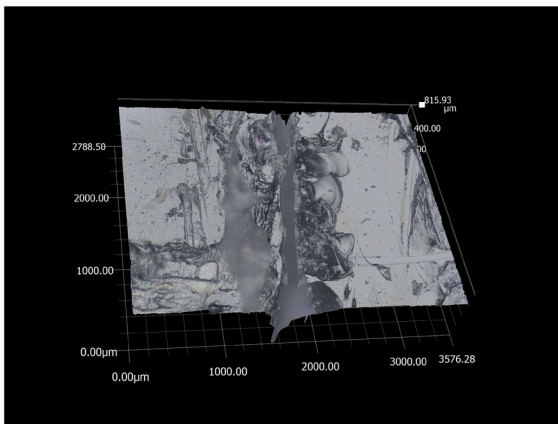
Surface fracture, fracture initiation point of specimen B2 on Sn surface
